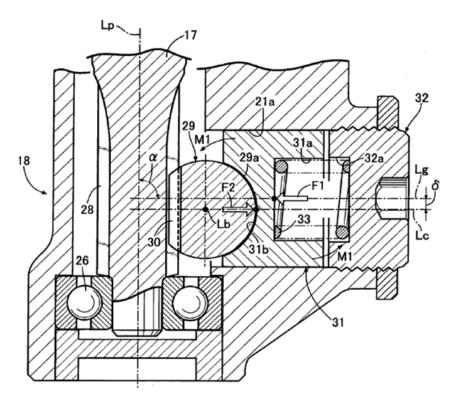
illustrates a rack and pinion gearing including a rack (29) which is biased against a pinion gear (28) using an asymmetric yoke (31) and a spring (33).
